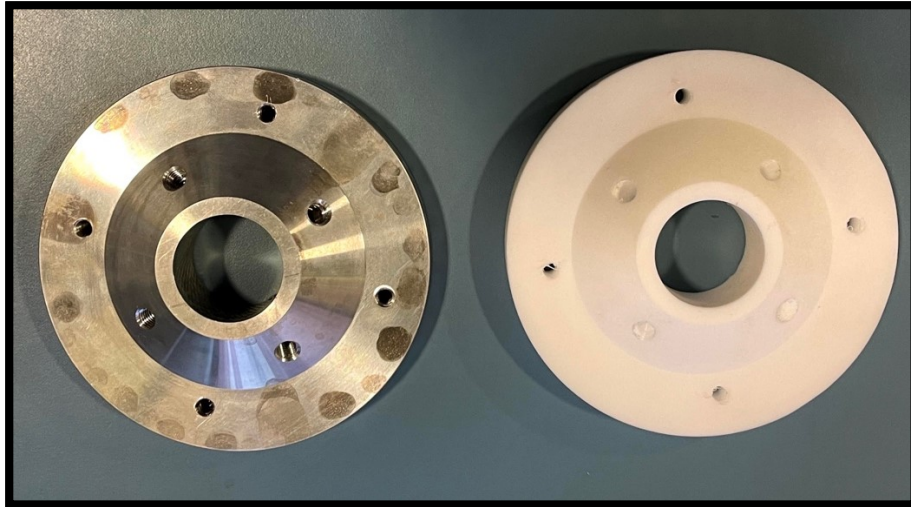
The gas inlet manifold actual machined part (left) and Prototype (right)
